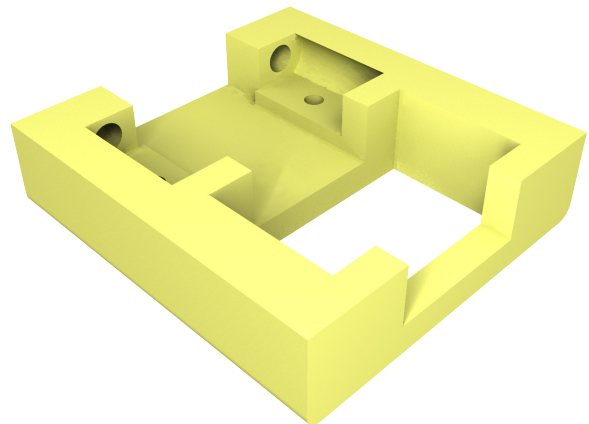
LED driver holder ray tracing. The LED driver seats in the square through-hole at the bottom right of the part. The top left of the part mates against the LED holder.
